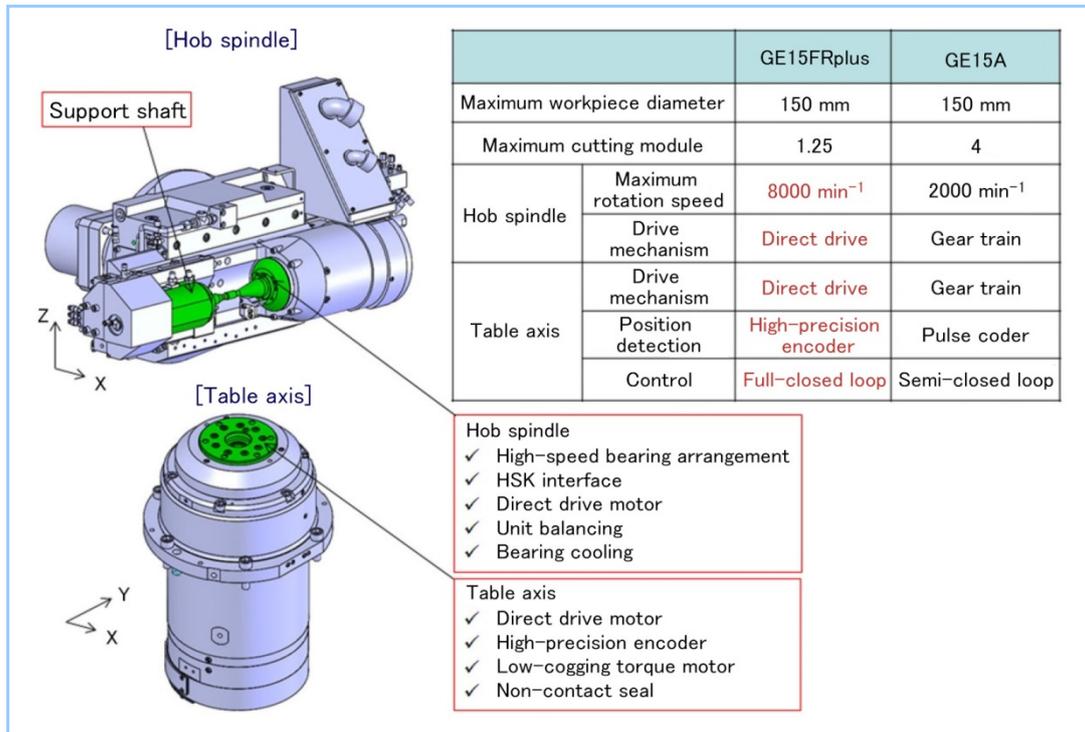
External views and mechanical specifications of GE15FRplus hobbing machine, including features of hob spindle and table axis
